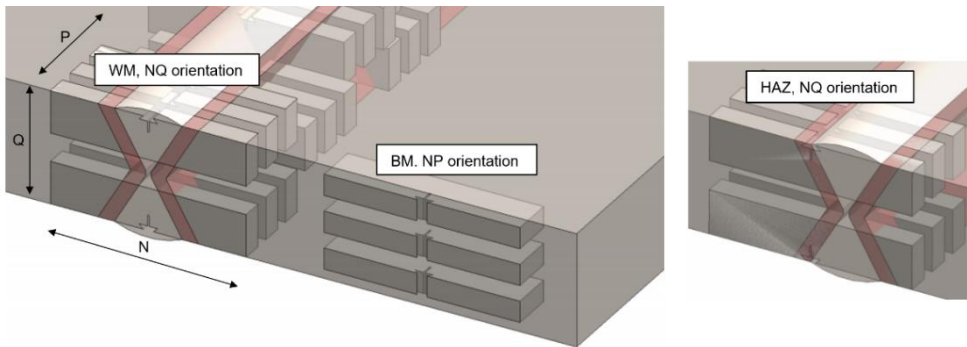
Fracture mechanics testing - SENB specimens placement in welded joint BM, HAZ and WM
